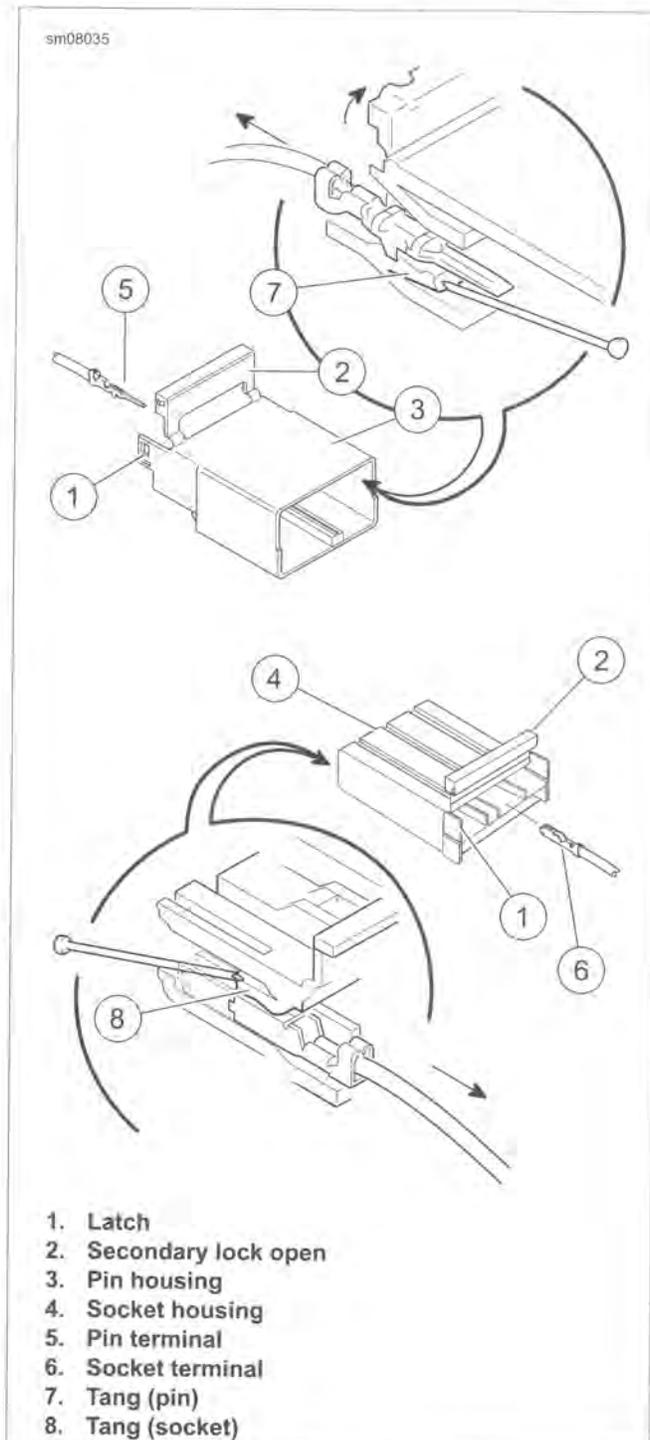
Tyco 040 Multilock Unsealed Connector: Socket and Pin Housings
